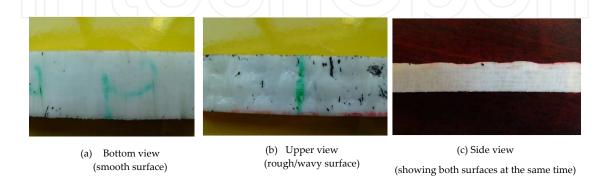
Different surfaces of an open-molded (oven vacuum bagged) twill specimen [68].
